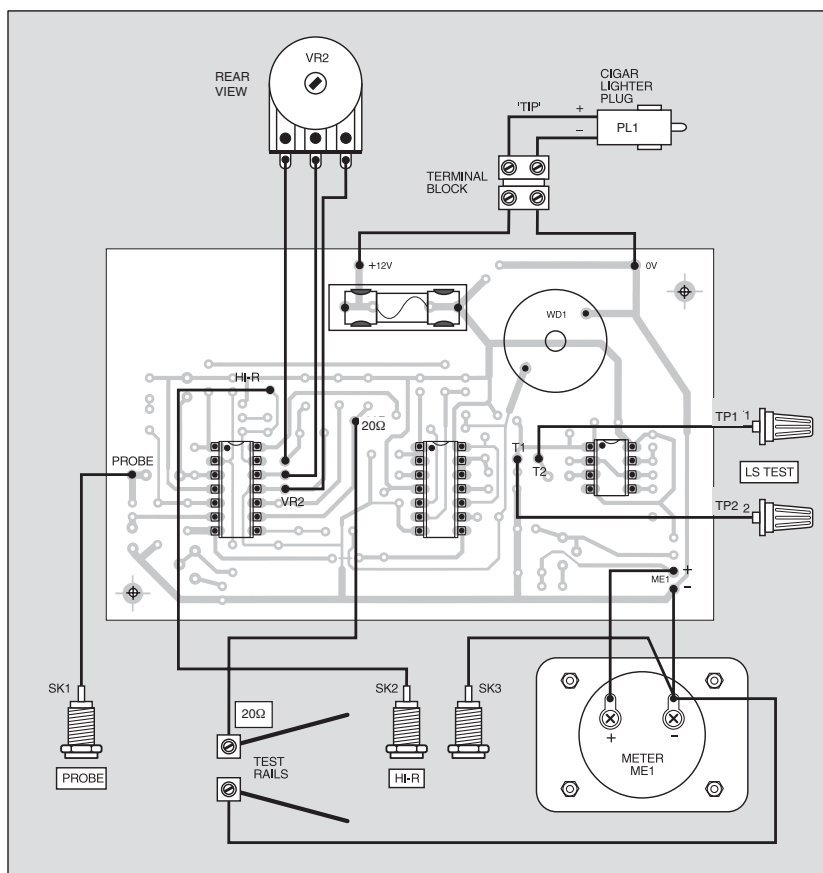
Interwiring from the printed circuit board to off-board components. The general layout within the case can be seen in the photographs.
